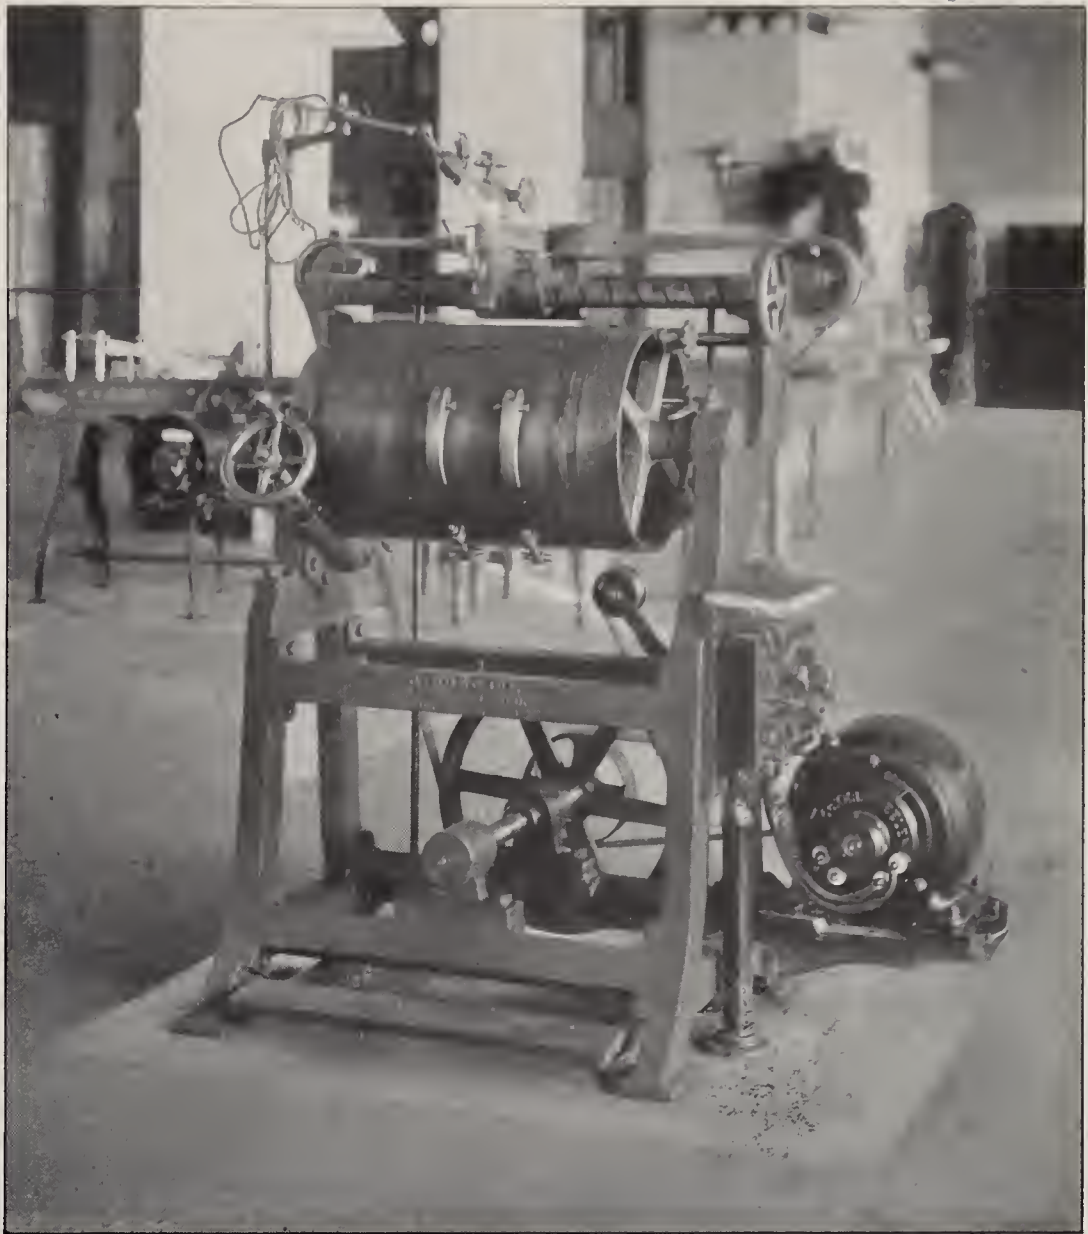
A MOTOR-DRIVEN MACHINE FOR ROUTING CURVED CYLINDER-PRESS PLATES. THE MOTOR WAS SUPPLIED BY THE CROCKER-WHEELER COMPANY, AMPERE, N. J.
